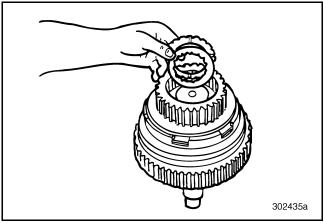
Removing Thrust Washers (T313L21/T318L21 Shown)
